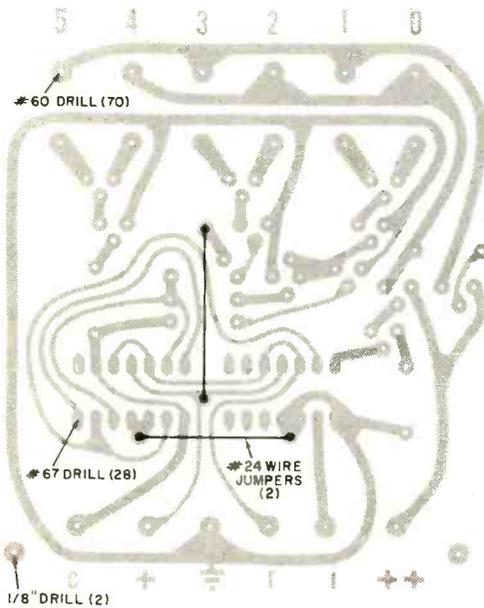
Drill the PC board as shown here, and add the two insulated jumpers on component side of board.
